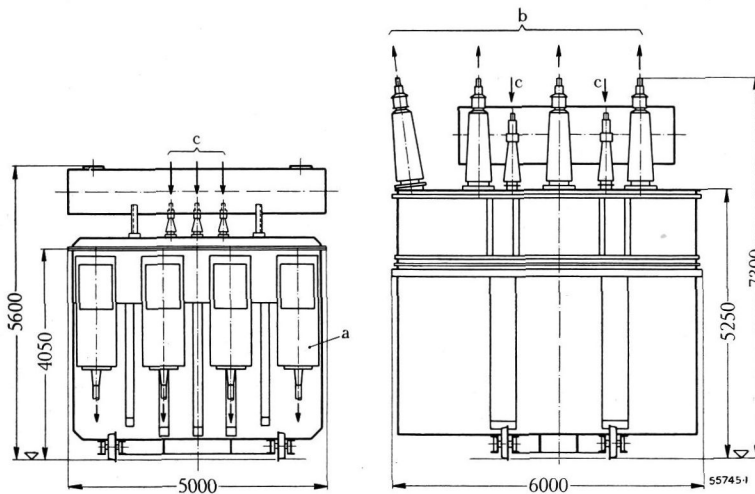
This comparison of the dimensions of a 47,000 kVA transformer of new design (left), with 150 kV cable end boxes, with those of a 26,000 kVA transformer of the year 1928 (right), with 150 kV outdoor bushings, shows more clearly than words can express the immense progress made in the construction of transformers during the last sixteen years.
